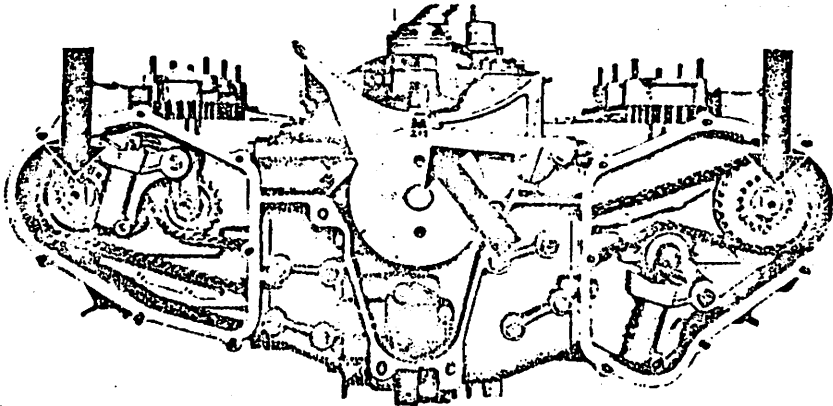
20 Checking valve timing. Outer arrows point to camshaft markings, central arrow to pulley mark Z1 aligned with crankcase joint
